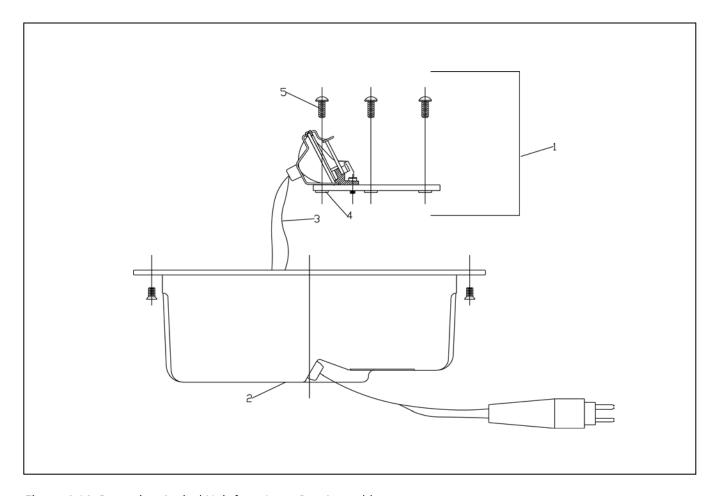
Removing Optical Unit from Inner Pan Assembly
